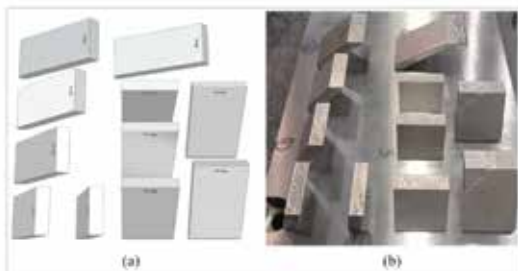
Specimen Parts (a) CAD Model, and (b) As-Built Condition
